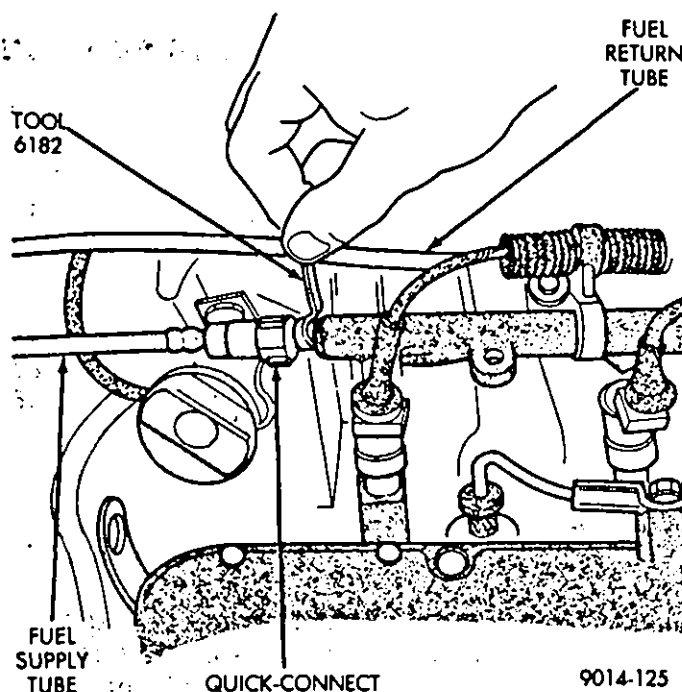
Disconnecting Fuel Supply Tube at Fuel Rail—MPI
